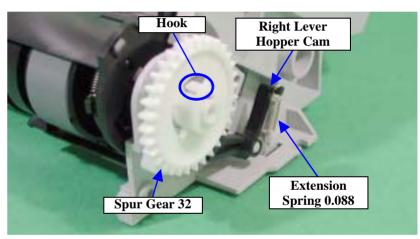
Removing the Lever Hopper Cam/Spur Gear 32
